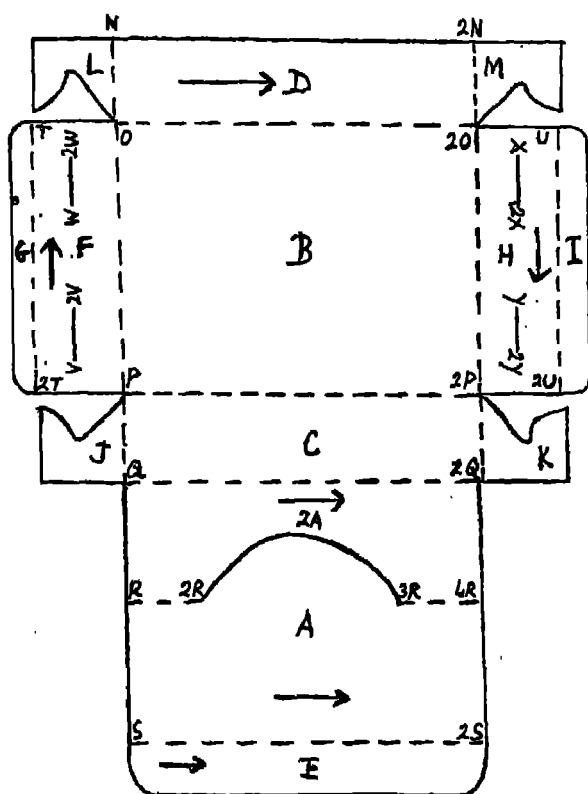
SINGLE-PIECE FOLDING DISPLAY BOX FOR RUBBER-BALL INDUSTRY.
